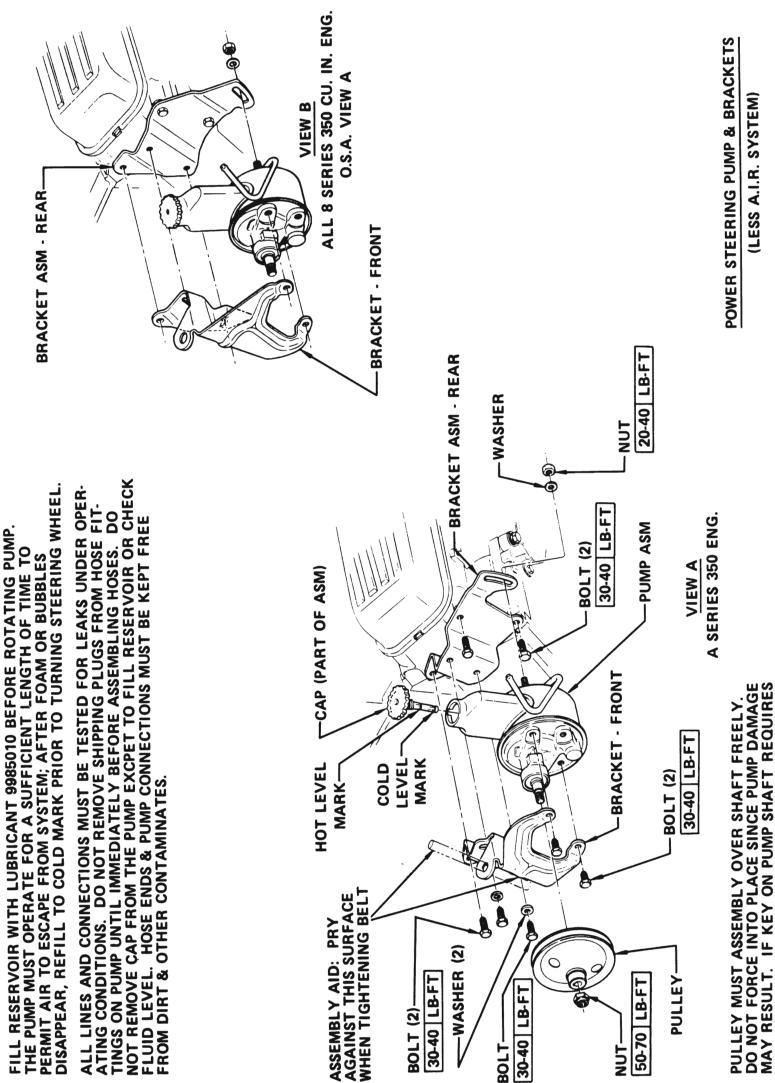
Power Steering Pump and Brackets - Less A.I.R.
